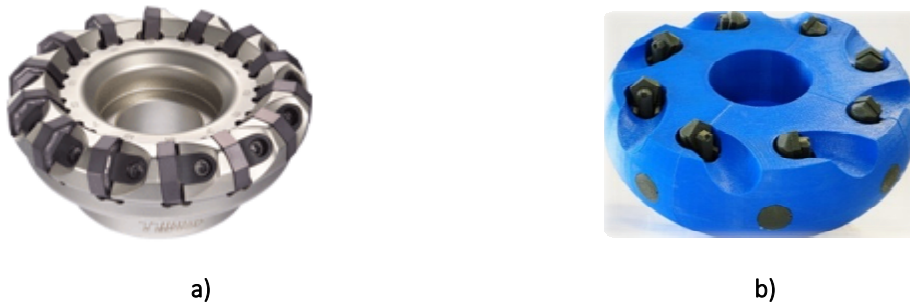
Flowing milling cutter (a), milling cutter with balancing screws (b)
